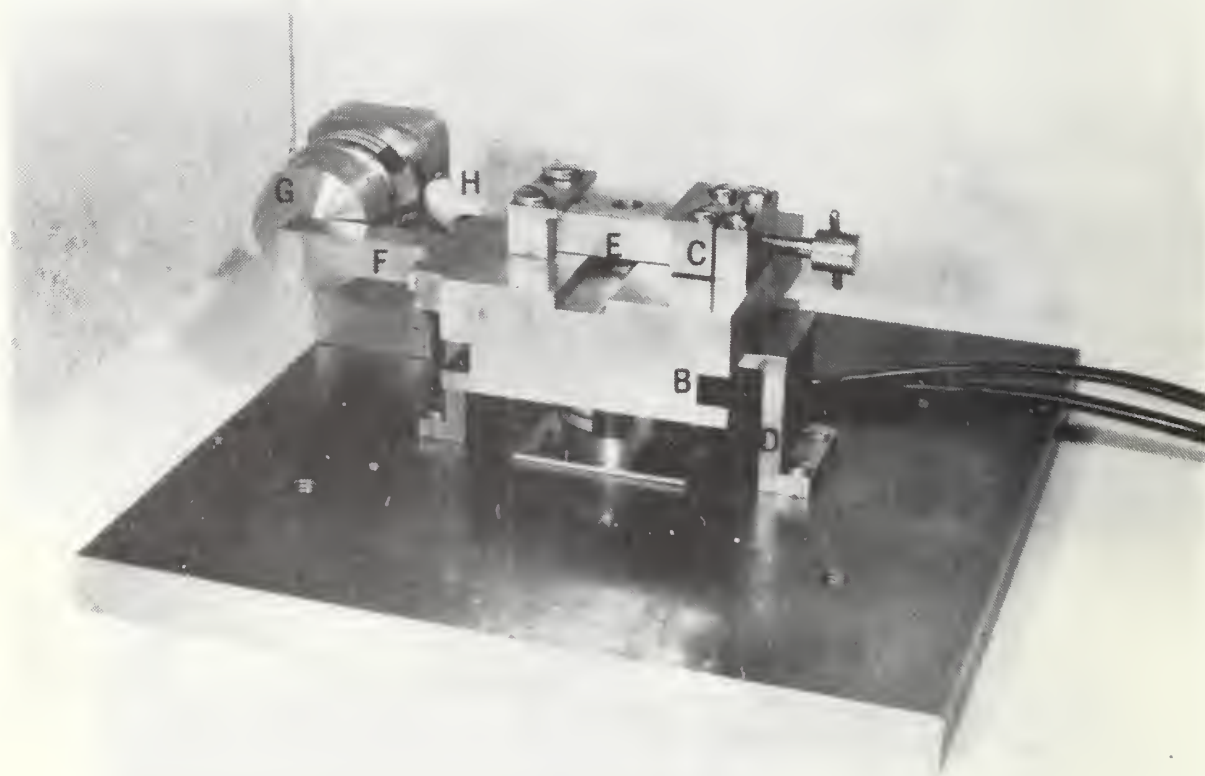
Force-and-torque measuring fixture - first model. Identified are the mounting plate (A) carrying the load-measuring load cell: the machined block (B) bearing on the capped armature of the load cell and carrying vise jaws (C): and the brackets (D) that restrain lateral motion of the block and hence of the workpiece (E). Also shown is the arm (F) extending from the block to contact the armature of the torque-measuring load cell (G). The spring (H) applies a preload to the cell so that the arm does not bounce against the armature.
